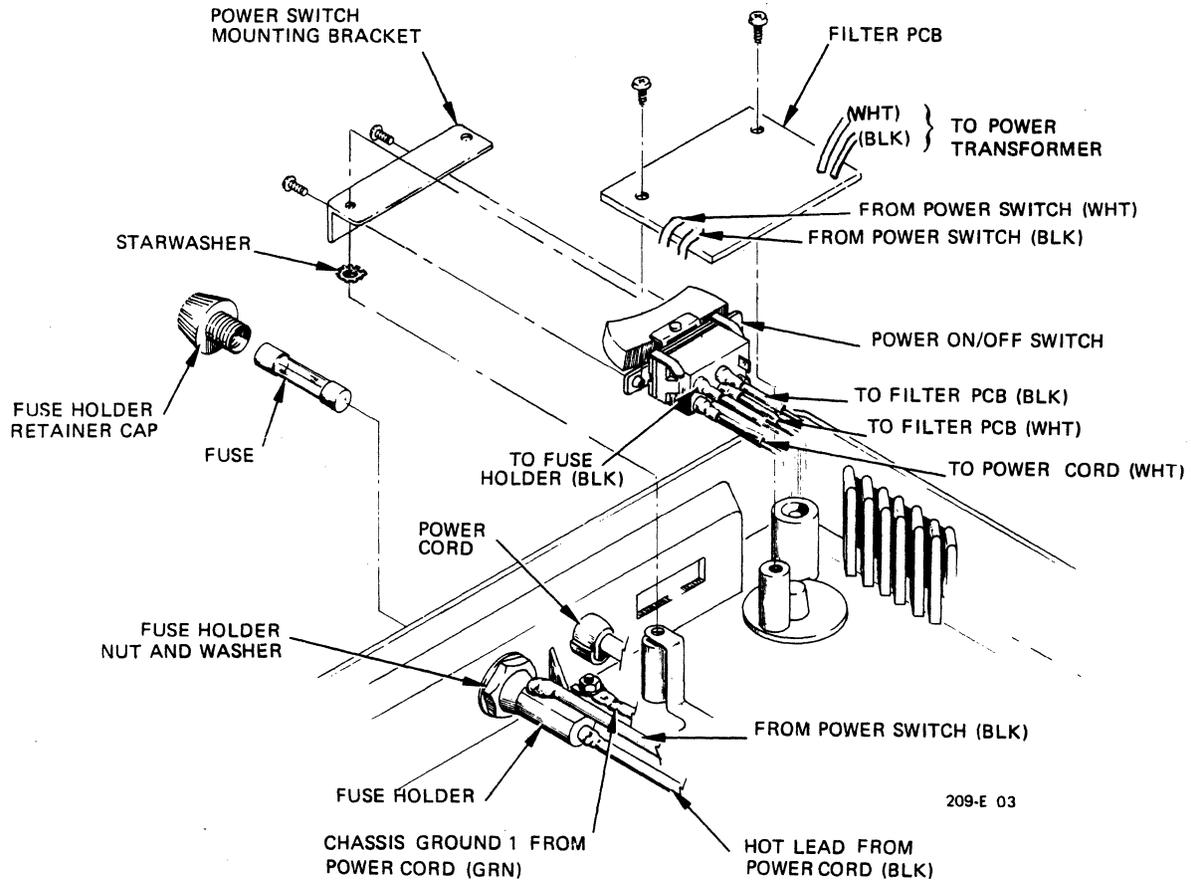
Power ON/OFF Switch and Fuse Holder Removal and Replacement
